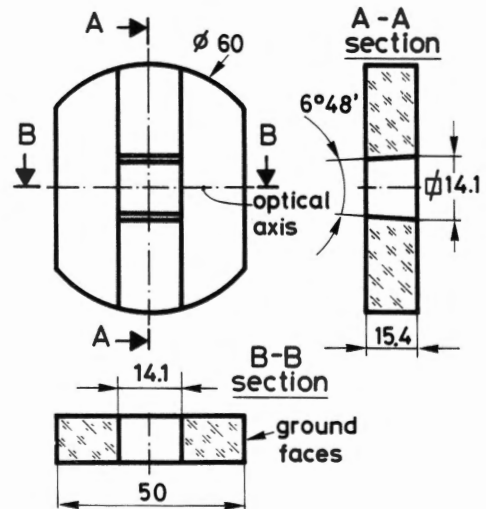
Optical window of the test section (all the dimensions are in mm).
